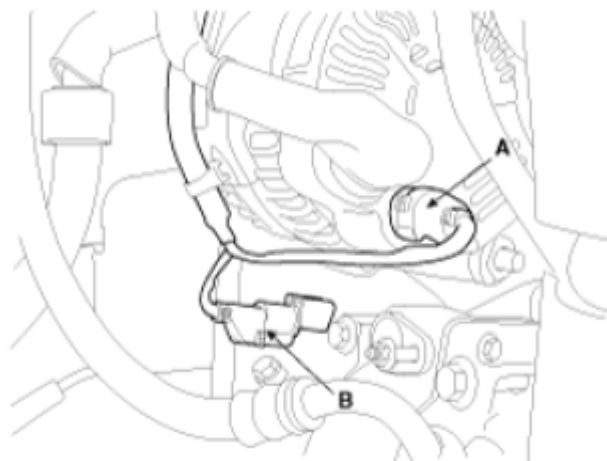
Identifying Generator Connector And Air Conditioning Compressor Connector
